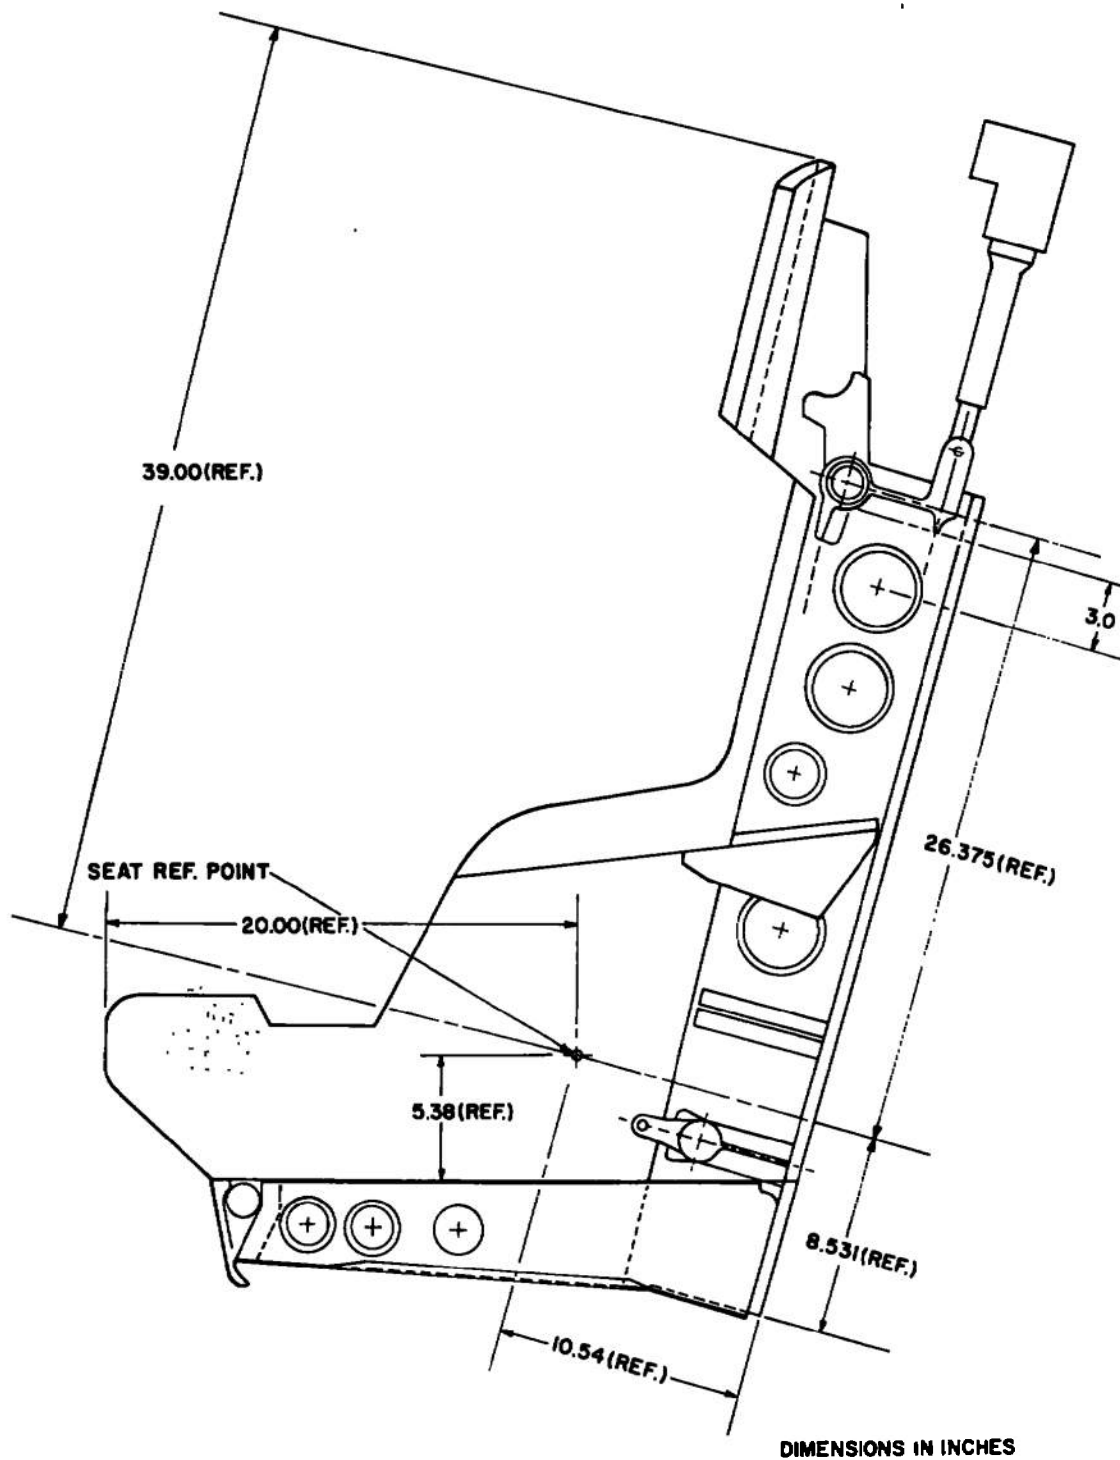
Dimensional Sketch of F-101 Ejection Seat
